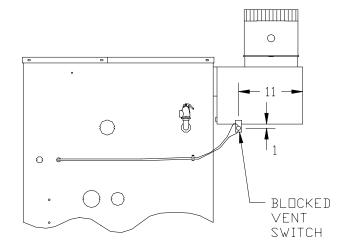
Blocked Vent Switch Installation, IN10 through IN12
